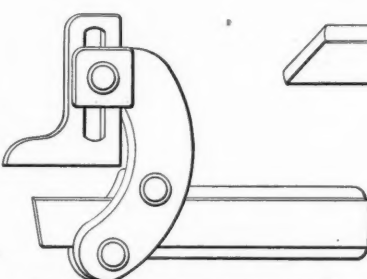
Slate Cutting-off Tool-holder provided with Steadyrest.
